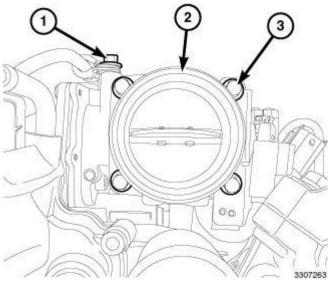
(EGR) Air Flow Control Valve Courtesy of CHRYSLER GROUP, LLC
